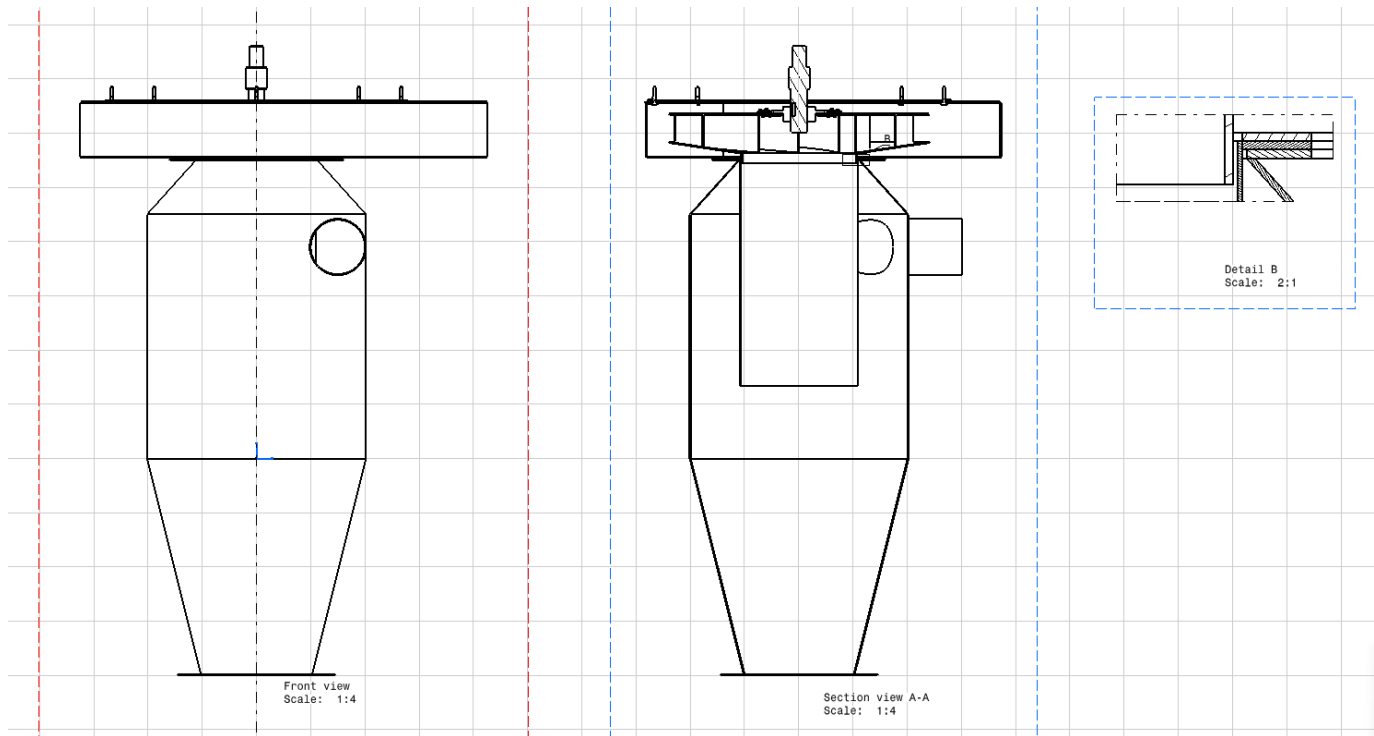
Mechanical drawing of the assembly of the cyclone aspirator device. The section view aids in illustrating the fitting of the inlet pipe inside the cyclone component. A detailed view in the area of the support of the casing to the cyclone is also included to help visualize how the fan's lip is threaded through the casing.
